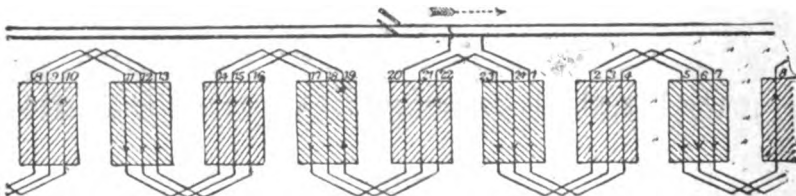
ALTERNATE-CURRENT MACHINE : WAVE-WINDING.
